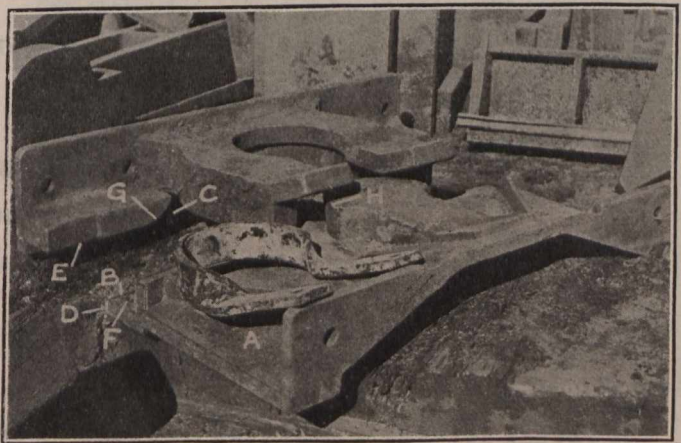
Bulldozer Dies for Brake-rod Stands.
